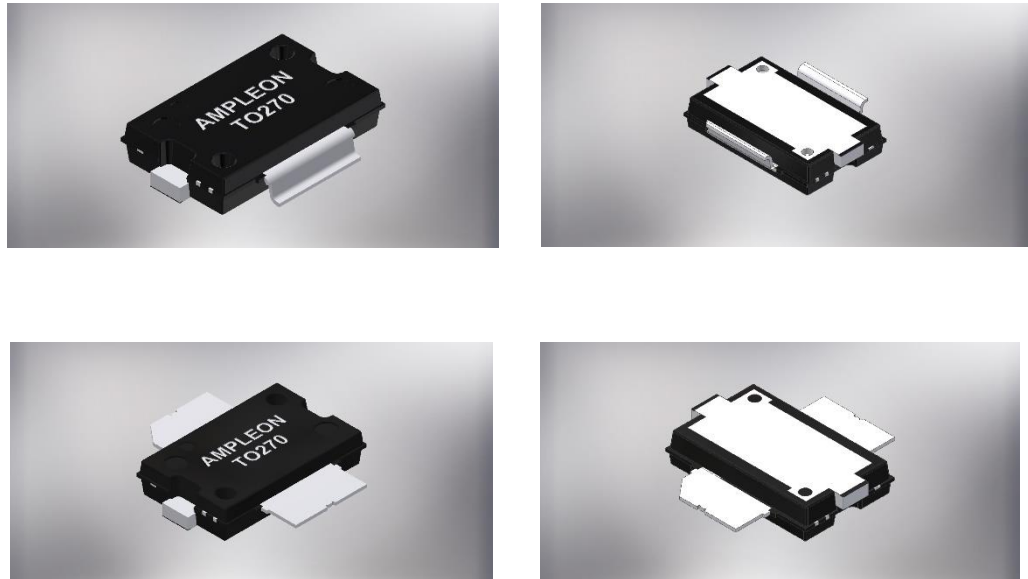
Typical TO package; gullwing and straight leads versions; top and bottom view
